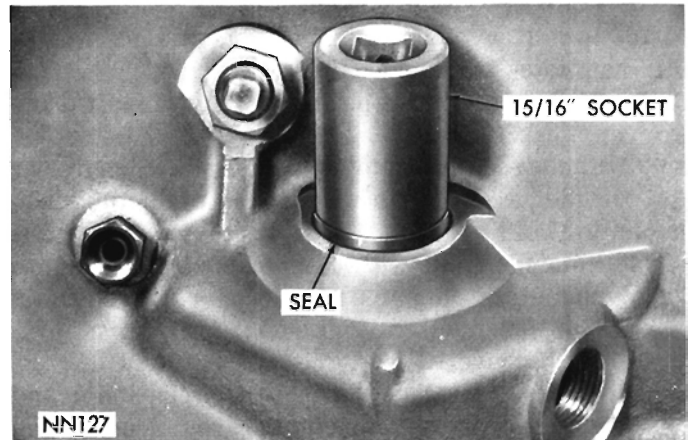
Installing Valve Body Manual Lever Shaft Oil Seal
